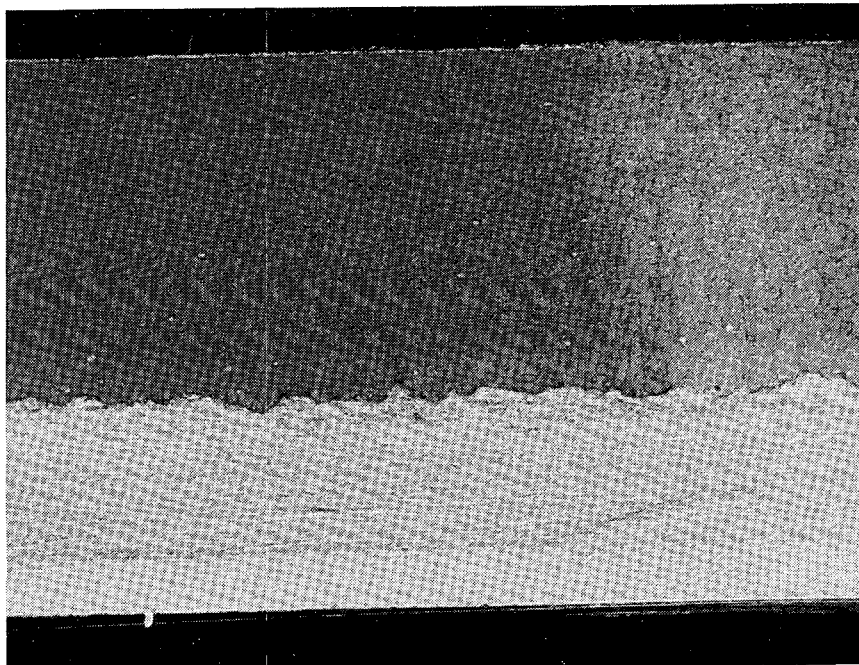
Longitudinal section of weld made using welding parameters of 140 kV, 13 mA, 0.060-in. (0.152-cm) circle diam at 200 cps oscillation, and 30 in. (76.2 cm)/min (11.5 X).
